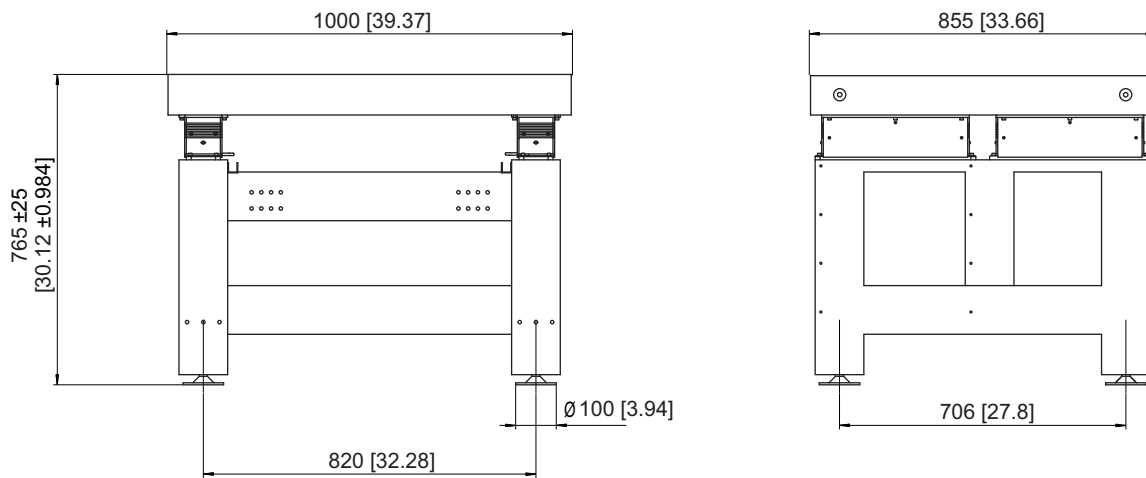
Front and side view of the optical table A-TAB-ELC-01 (Dimensions not specified are given in mm.)
